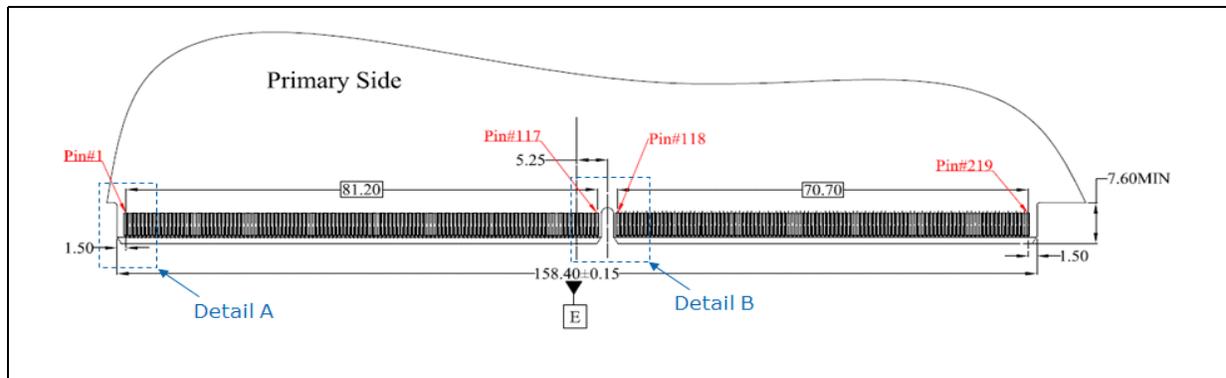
Intel SMI2 Riser Card Dimensions (Detail A)
